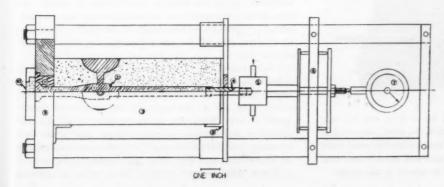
Schematic diagram of hot tear testing device: (1) hot tear casting; (2) point of fracture; (3) core sand mold; (4) steel stud; (5) water cooler; (6) differential beam-type spring; (7) indicator gage, 0.0001 in. per division; (8) alignment frame; (9) base block; (10) end core; (11) chill plug.
